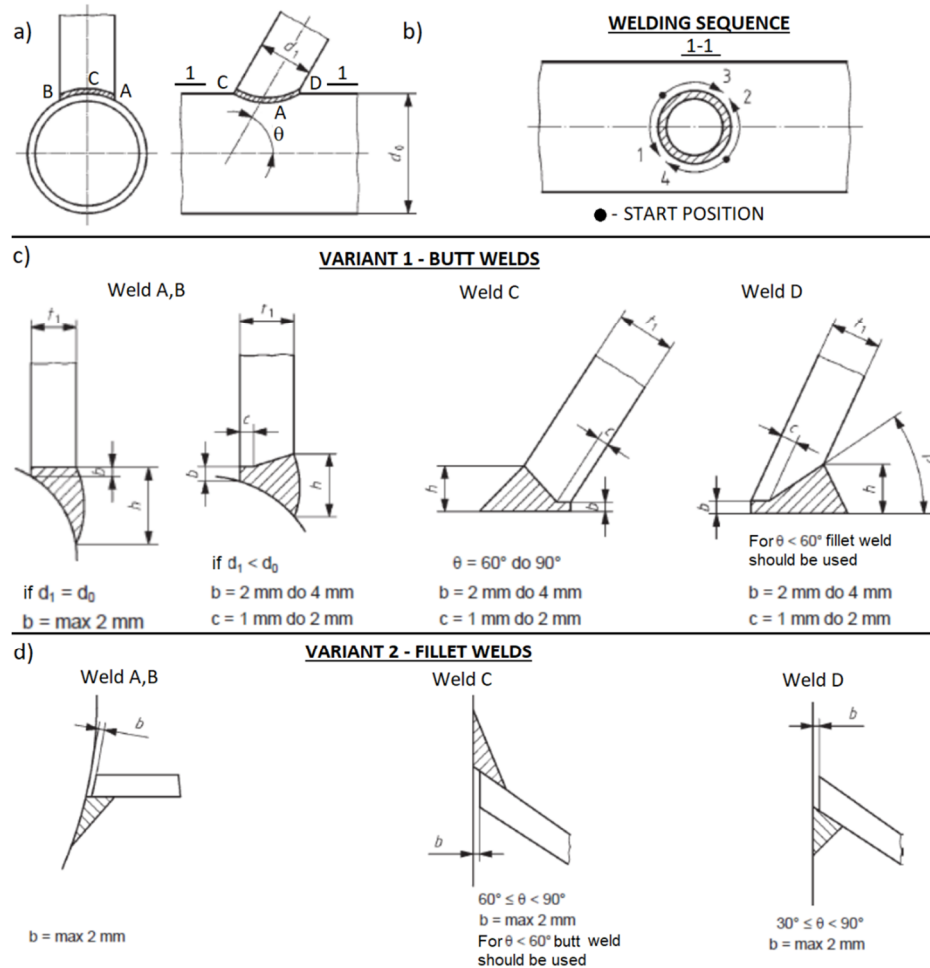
Welded joints in circular steel hollow sections: a) description of welds and dimensions, b) start and stop positions and welding sequence, c) preparation of joint faces in the case of butt welds, d) preparation of joint faces in the case of fillet welds
